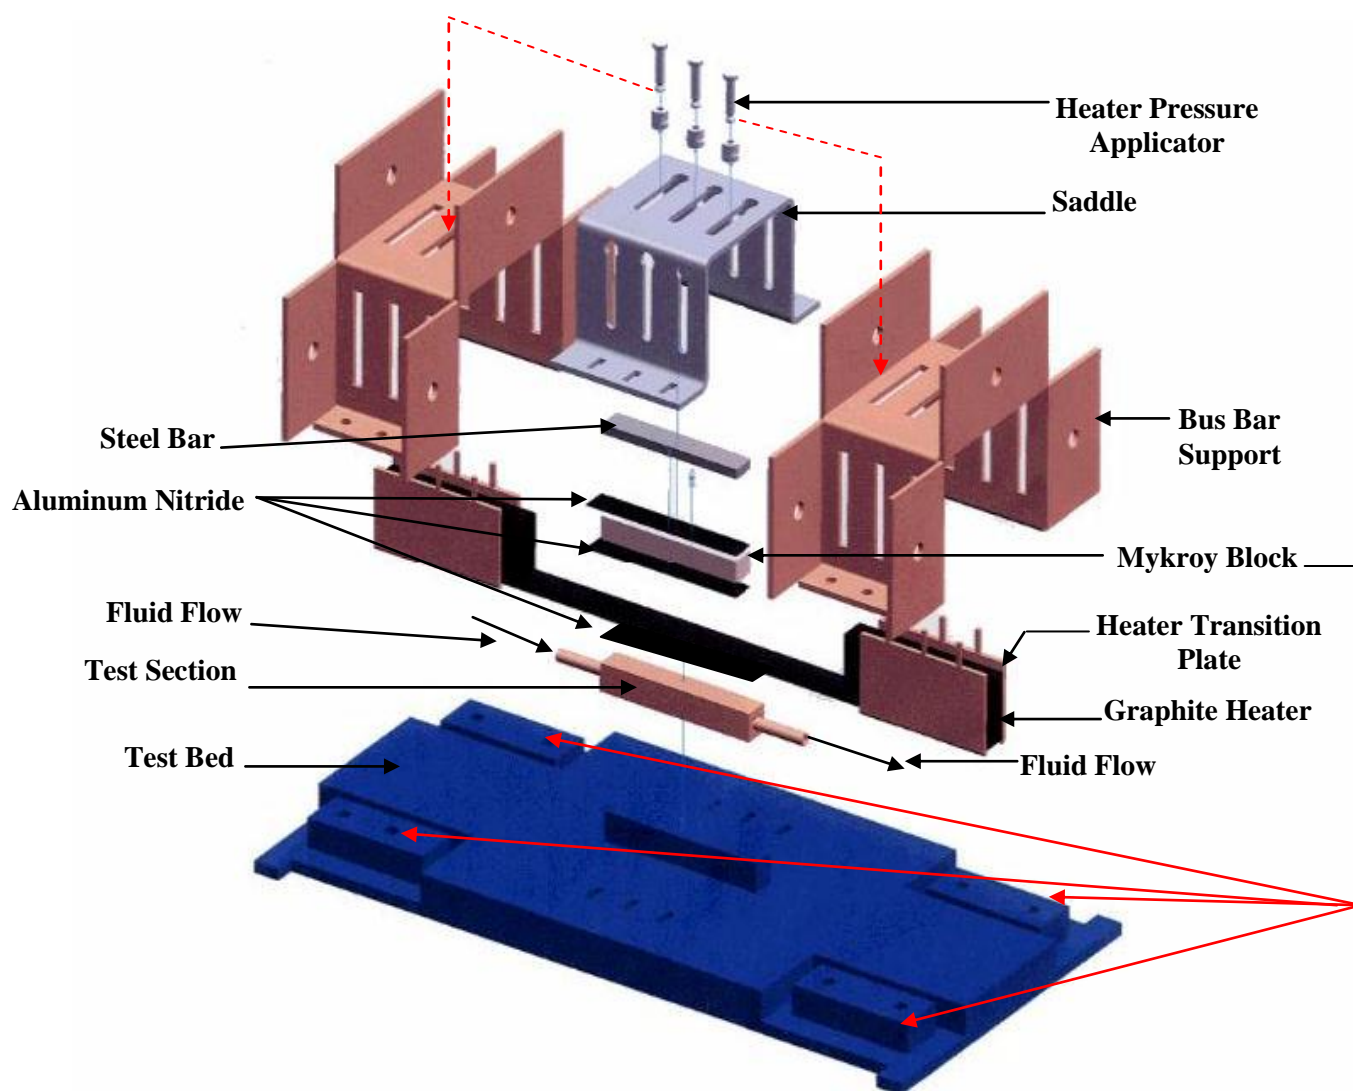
High Heat Flux Monoblock Test Section (TS) Expanded Assembly.
